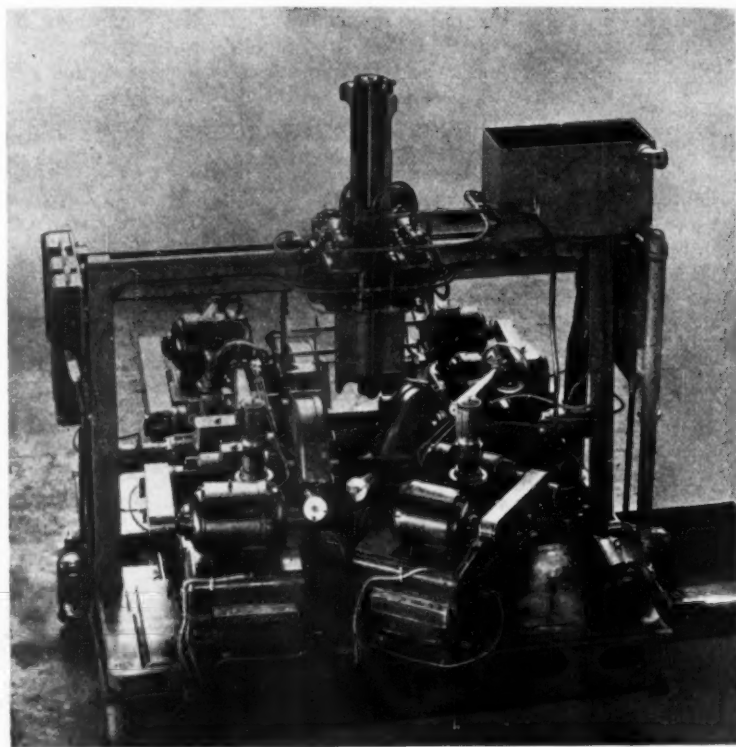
GRINDING MACHINE FOR GRINDING FOUR SURFACES SIMULTANEOUSLY
